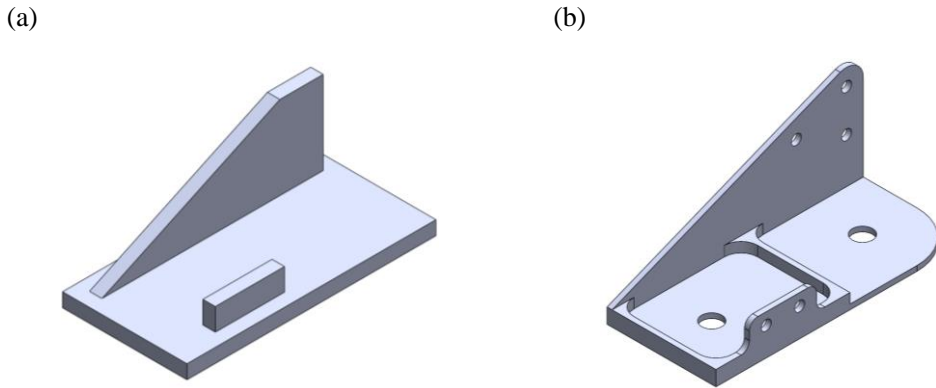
3D model of the bracket in the (a) as-built condition and (b) after final machining
